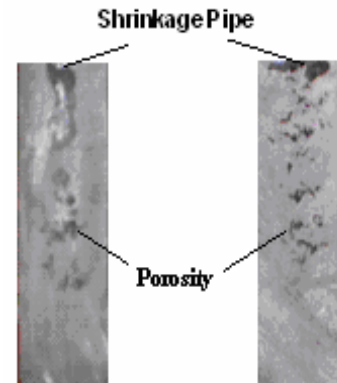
Shows Al-12.6% Si Casting after sectioning that cut from the centerline with cooling rate (1°C/sec) Fig (4) Shows Al-7%Si casting after sectioning that the cut from the centerline with cooling rate (1°C/sec)
